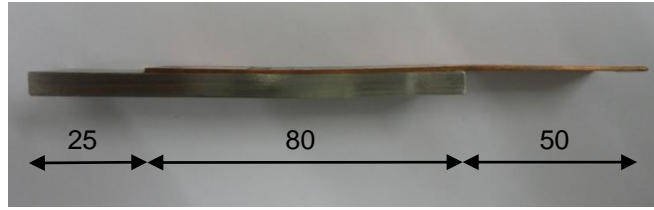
Test specimen I 22 4S OR = 0.5 (dimensions in mm).
